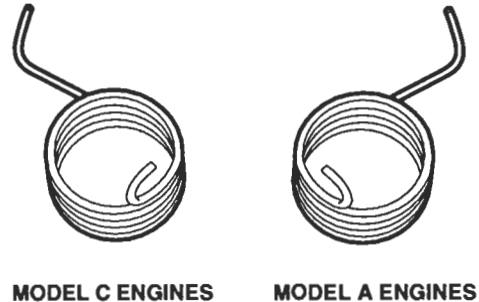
Hydraulic Governor Control Lever Retracting Springs
